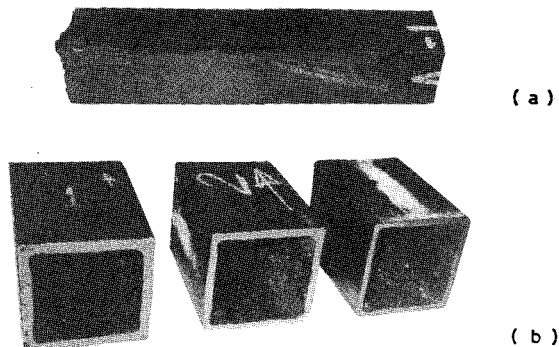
Continuous casting slab obtained from primary cooling zone during interrupted run. (a) Complete piece. (b) Sections showing thickness profile
